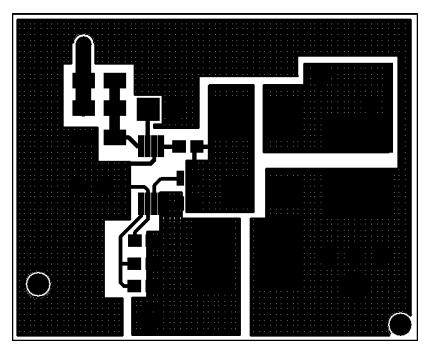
LM3489 Demonstration Board PCB Top Layer Layout
